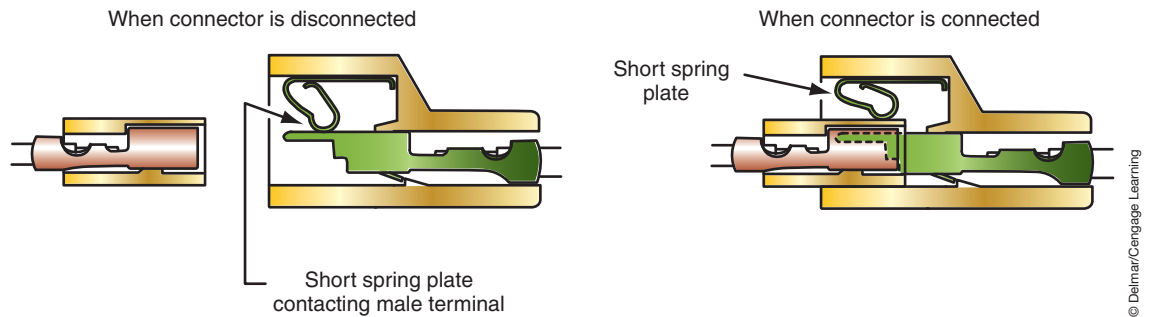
Shorting bars on air bag system wiring connectors.
